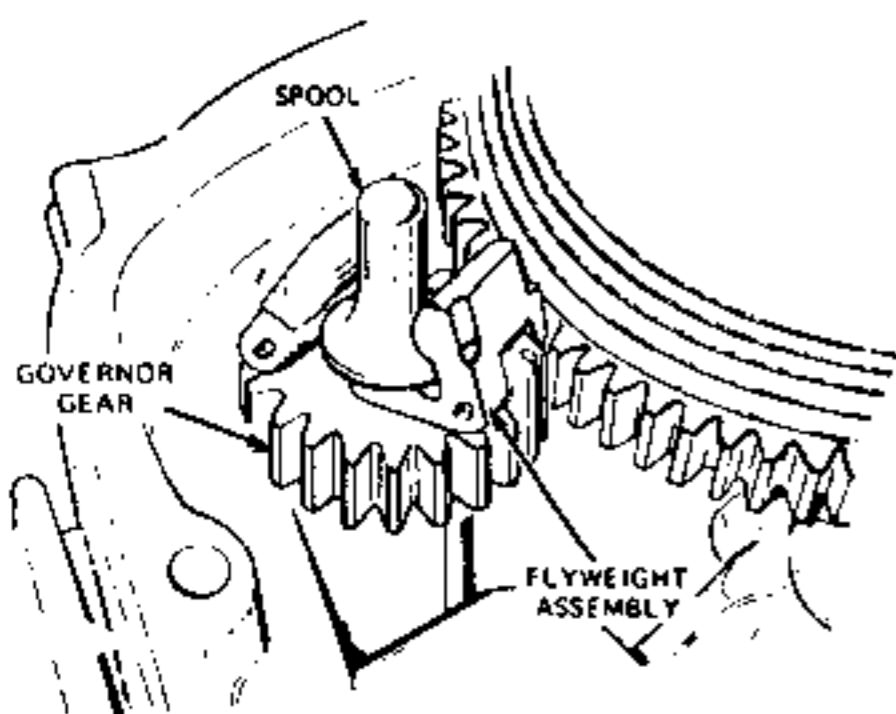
View showing governor assembly installed in crankcase. Governor gear is driven by camshaft gear.
